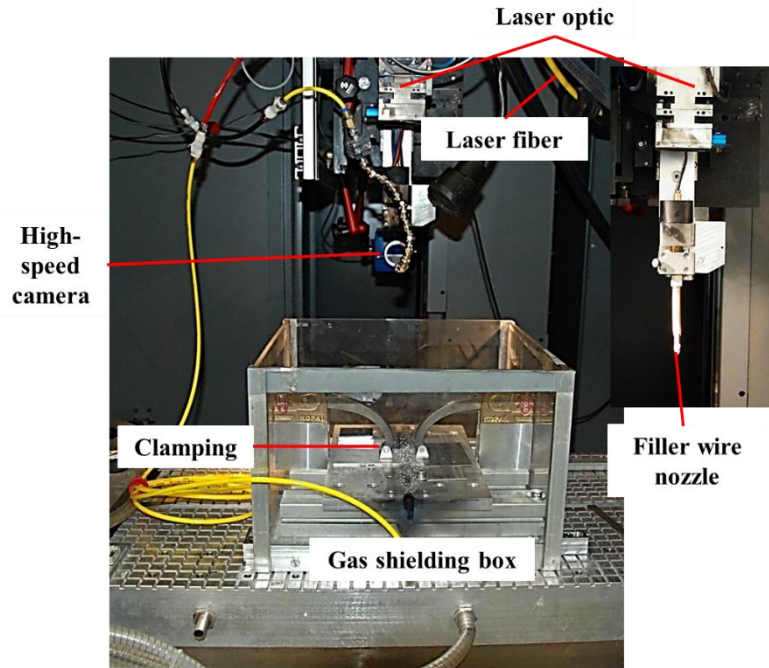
Experimental setup for similar and dissimilar Ti-alloy joints welded in flat position.
